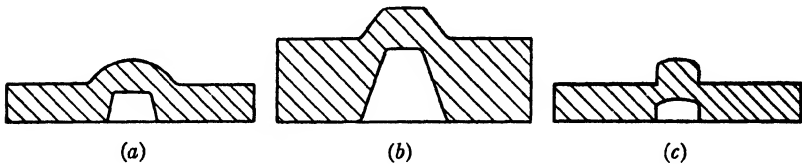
Cross-sections of projections for projection welding. (a) For 24 to 13 gage sheet material. (b) For 12 to 5 gage sheet material. (c) Incorrect type of projection.
